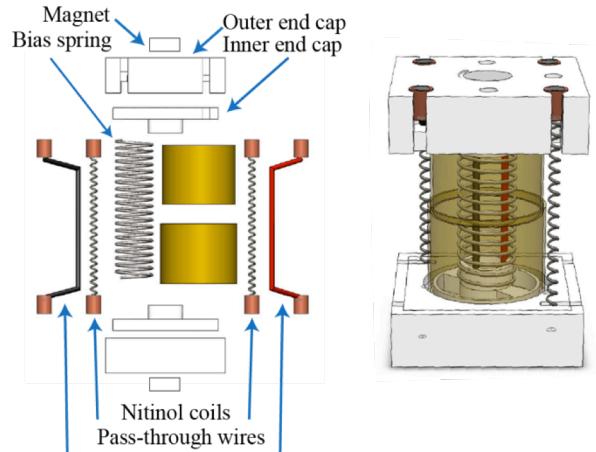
An exploded view of the assembly of an active cell (left) and a fully assembled cell (right). Each Nitinol coil and pass-through wire, with their copper terminals, are prepared previously to assembly. Then, the brass tubing is attached to the inner end cap piece and the magnets are attached to the outer end cap piece with CA glue. The final step is simple assembly of the constituent pieces.
